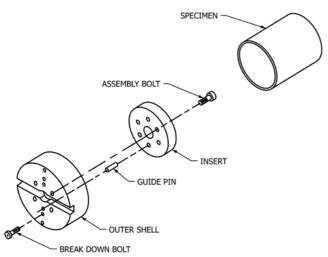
Assembly Drawing for the Compression Fixture and Specimen
